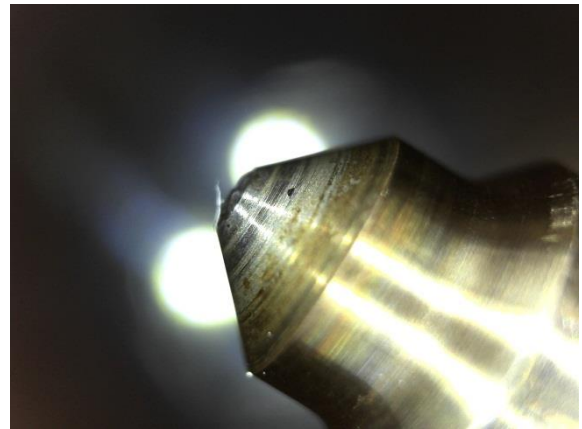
Zoom up view of the hollow piston valve (After HSD trial)
